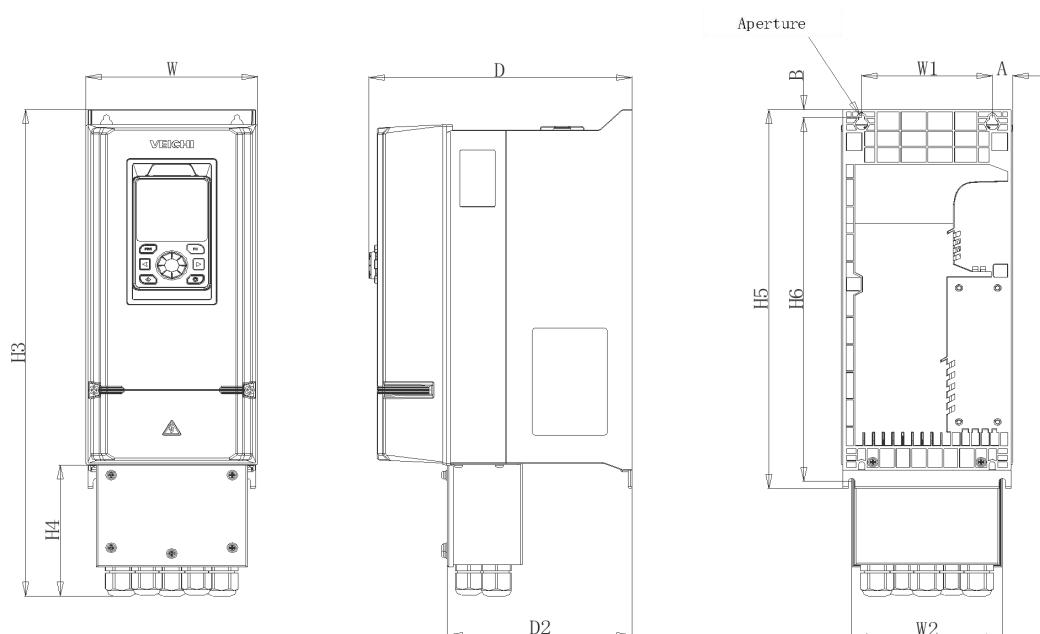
V1~V3 Junction Box Overall Dimensions and Hole Size
